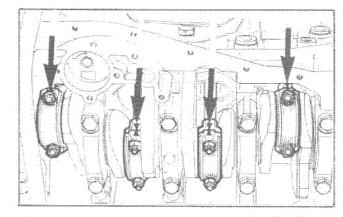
Mark big-end caps for location - 807/841/843 engines
